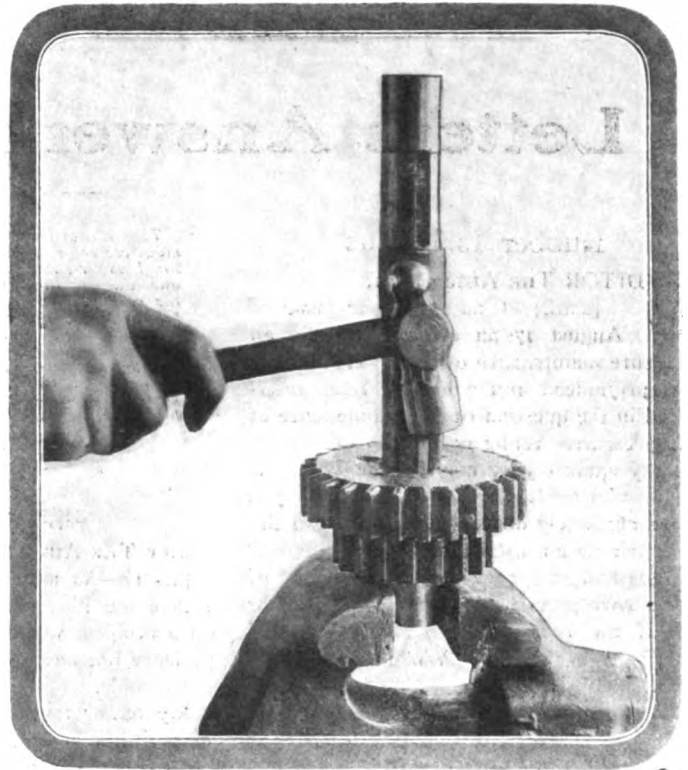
Method of driving key into keyway when it is desired to hold gears in correct relative position
